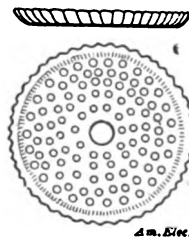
LEAD DISHES PUNCHED WITH 3-16 THS IN. HOLES.
